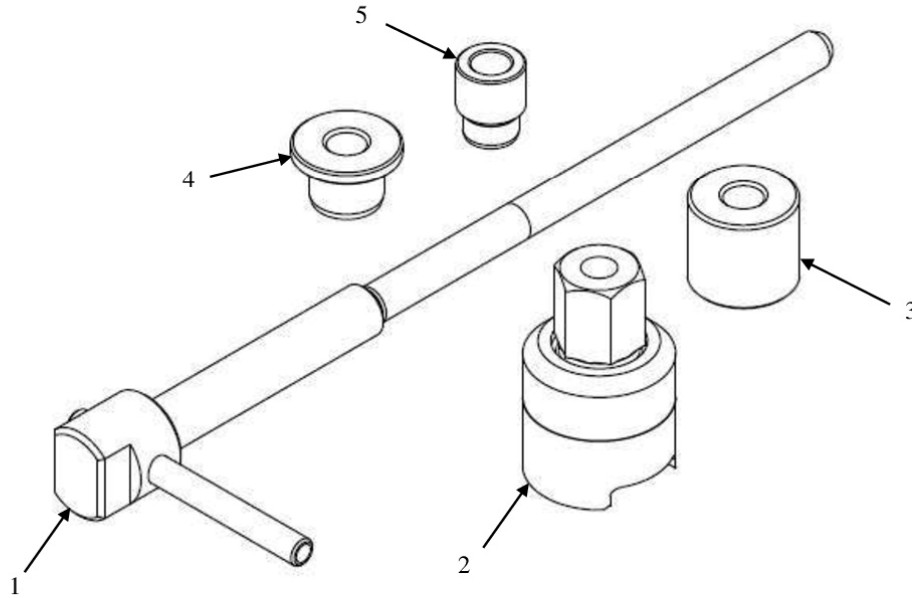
EQUIPMENT FOR REM/INSTL BUSHING
